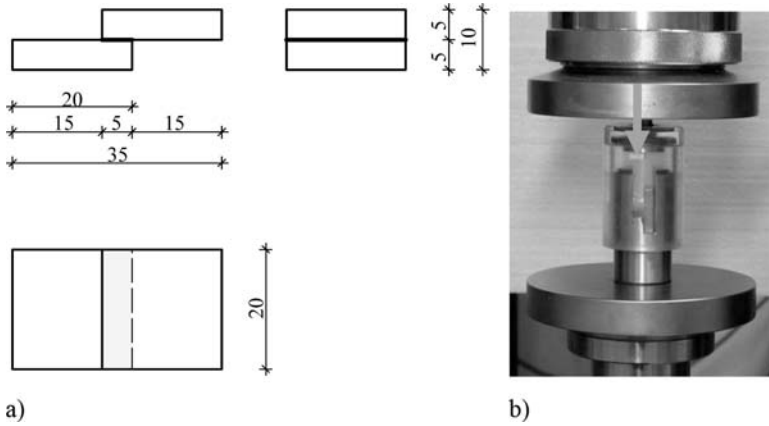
Test specimen used to investigate shear strength before and after aging: (a) schematic drawing of test specimen with dimensions in millimeter; (b) specimen placed in the testing machine.
